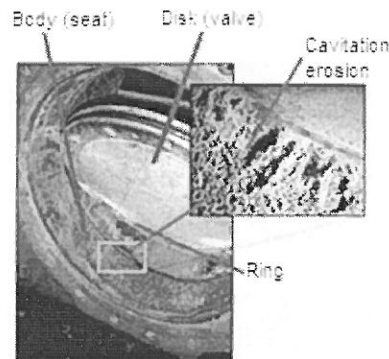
(1.14) Butterfly valve eroded through cavitation
